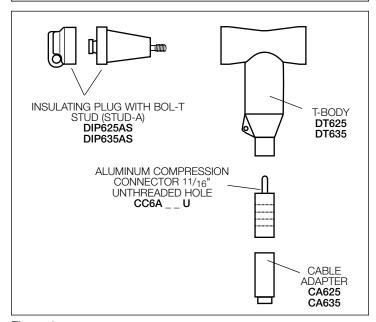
BOL-T connector kit (BT6_5) components. For more details, see catalog sections CA650003EN and CA650008EN.
